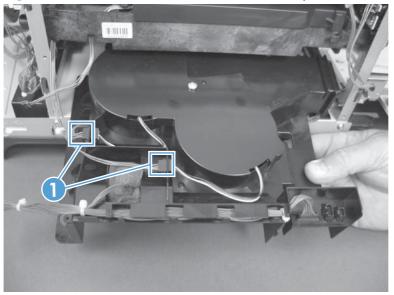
Remove the laser/scanner assembly (Y/M) (8 of 12)
